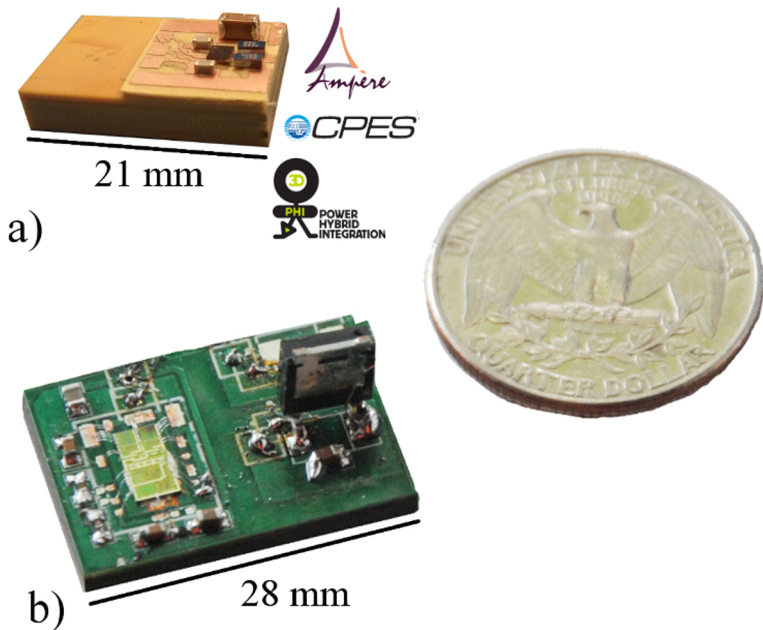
a) 2.2 MHz prototype with GaN transistors and PCB integrated coplanar-windings transformer; b) 1 MHz prototype with SOI chip and PCB integrated coplanar-windings transformer.
